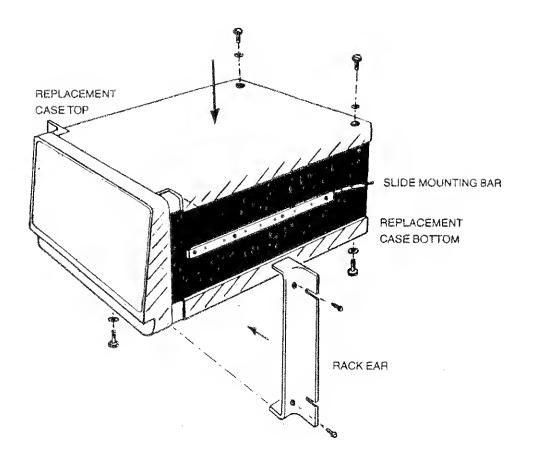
Fitting the rack ears, slide mounting bar, and replacement cases.
